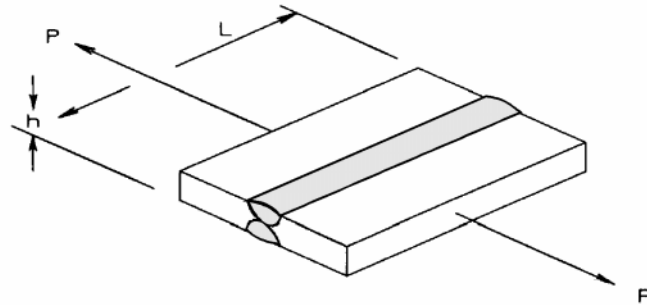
Butt Weld with Direct Loading Stresses In Fillet Welds (*Courtesy of the American Welding Society*)
